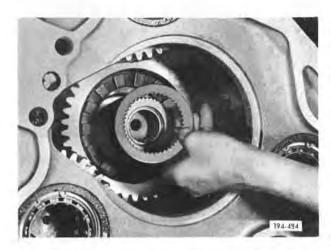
Installing Lo-Range Gear Front Thrust Washer
